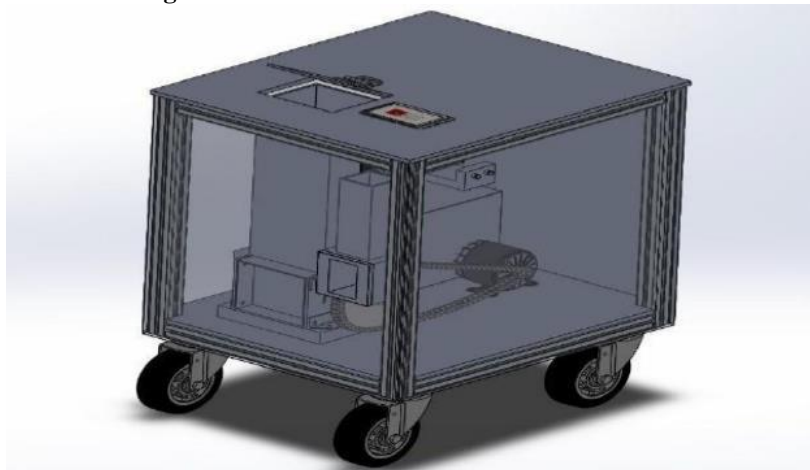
Main frame mechanical design of PET bottle shredder reverse vending machine
